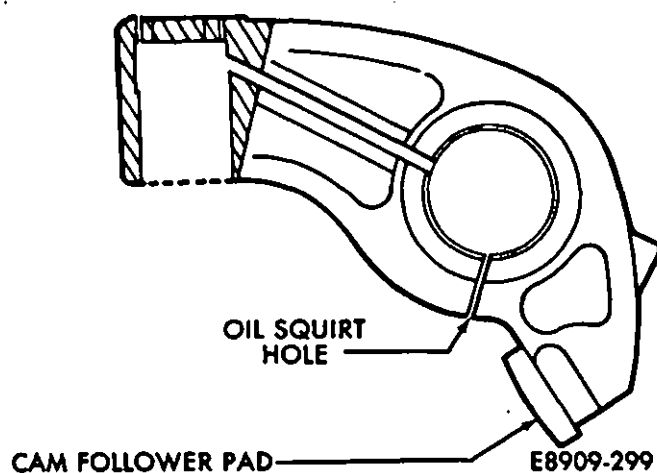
Oil Squirt Hole/Cam Follower Pad
